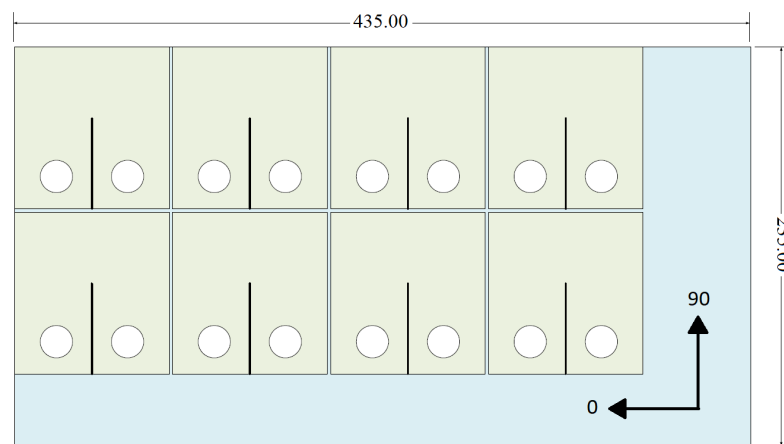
Panel geometry and specimen layout for the NCF compact tension specimens, all dimensions in mm.
